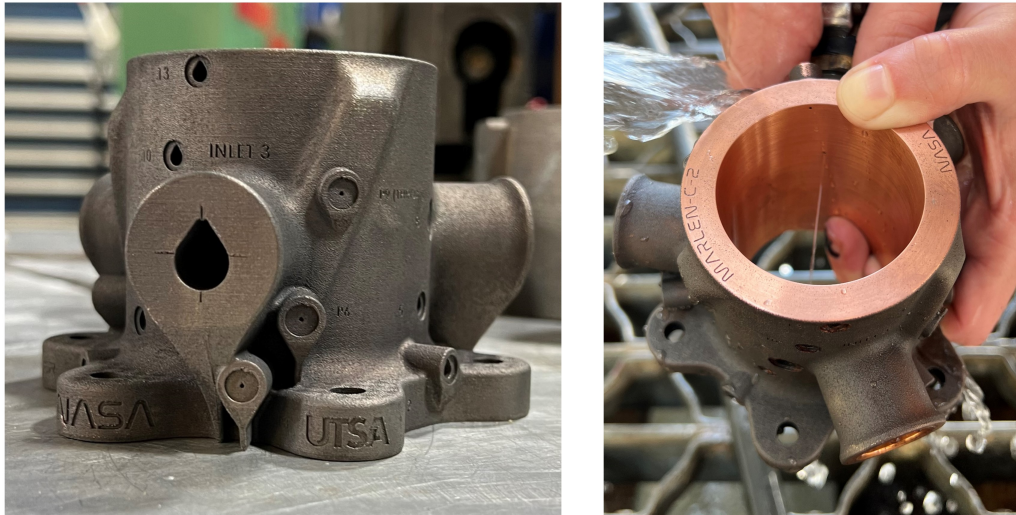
Additively manufactured calorimeter hardware, as-printed (left), post-AM machined (right).
